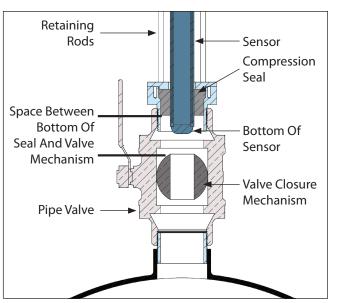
Cross-Section Of Meter Showing Sensor Removal
